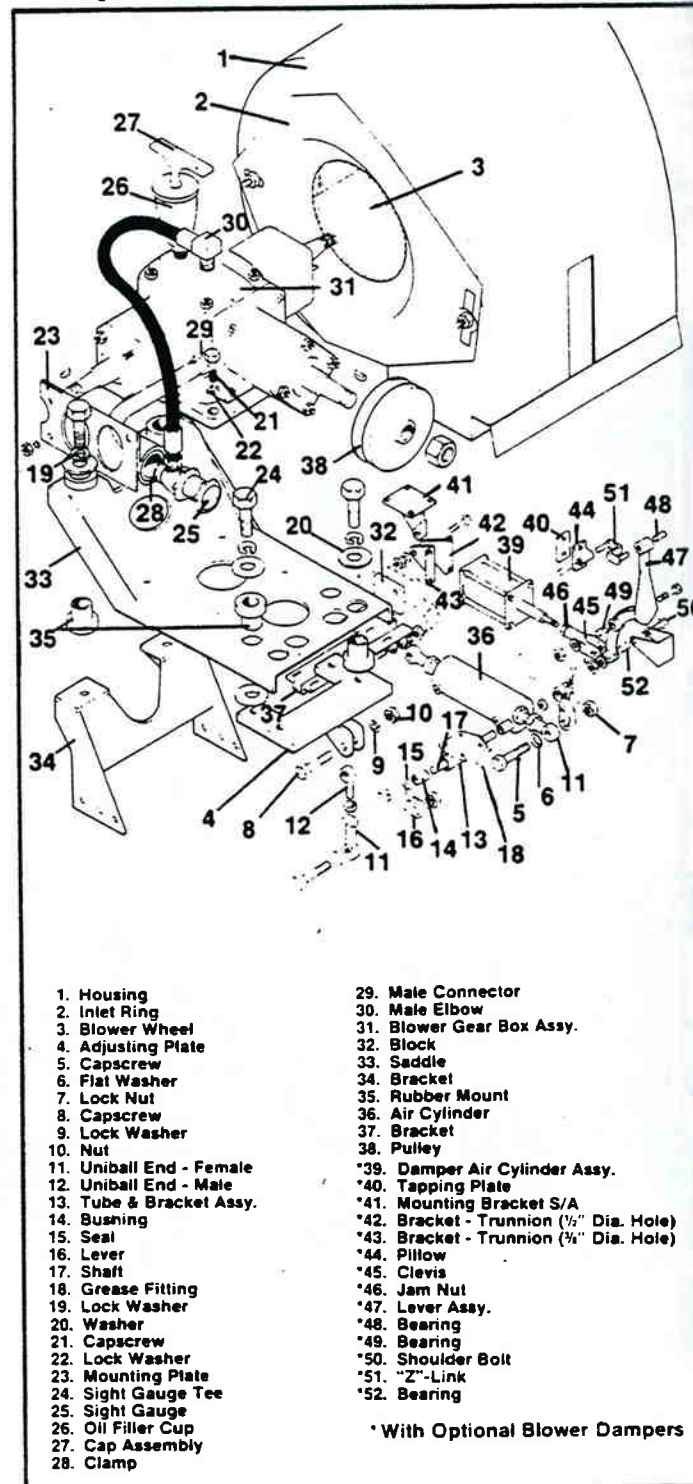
Blower Gear Box and Air Cylinder Linkage.
